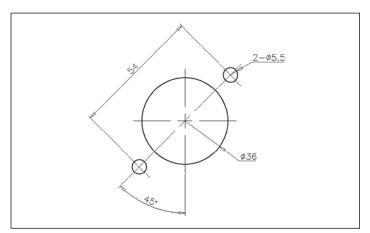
Universal Handle Mounting Bolt Drilling Plan
